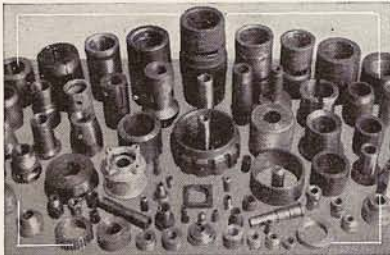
Typical Bushings Which Can Be Made in the 16-inch Lathe.
